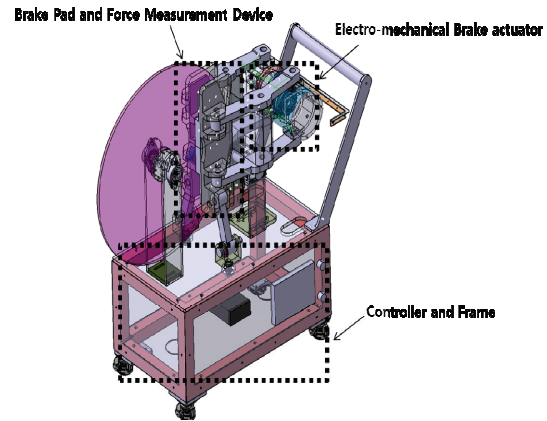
Schematic views of the electro-mechanical actuator with the brake caliper and disc
